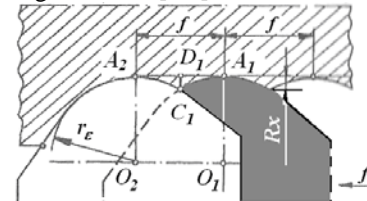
Idealized geometrical model of machined surface in turning with a tool where $r_\epsilon \neq 0$ [5, 8]
